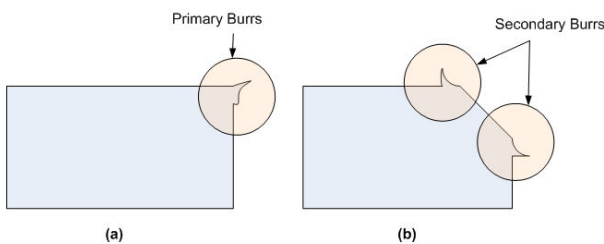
Burr formation (a) Primary burrs (b) Secondary burrs
